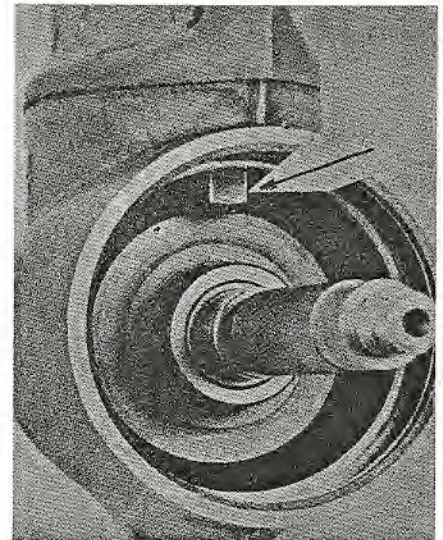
Lower unit gearcase with propeller shaft bearing cage removed. Stud nut (arrow) must be removed before gearcase can be detached from driveshaft housing.
